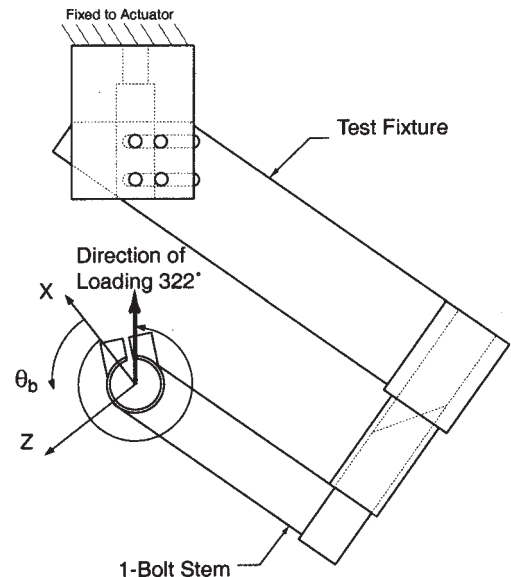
Diagram of fatigue test fixture designed to load both stems at the direction of maximum damage 322°.
